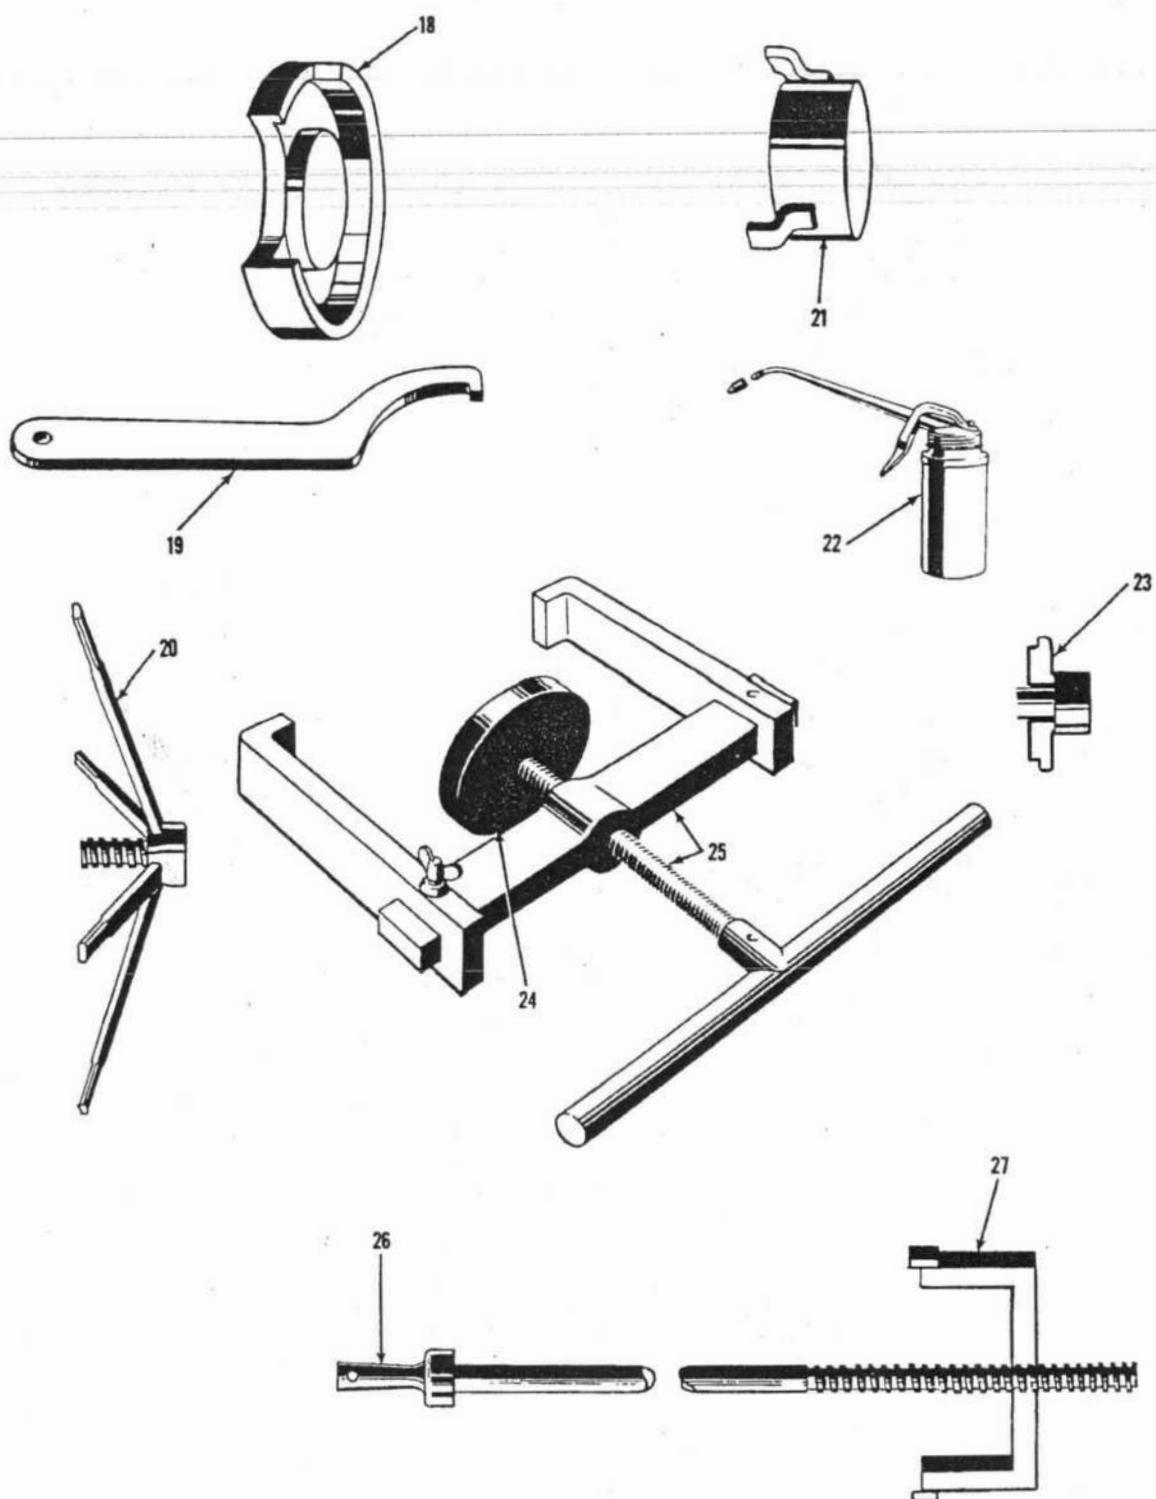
20 MM A.A. Guns and Mounts Special Tools
